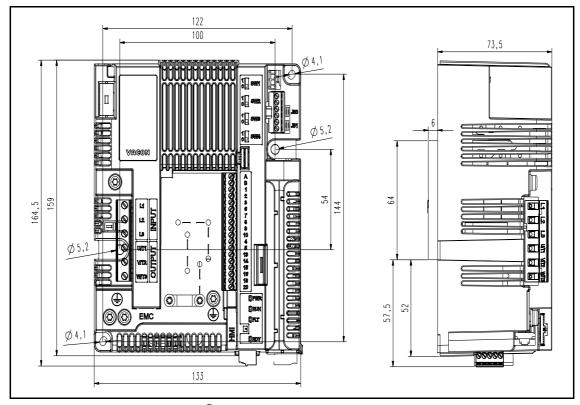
VACON[®] 20 Cold Plate, MS2 three-phase version.
